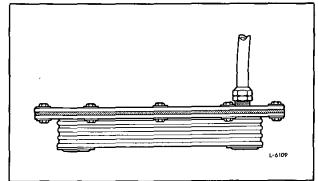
Preparing Oil Cooler Core for Pressure Test
